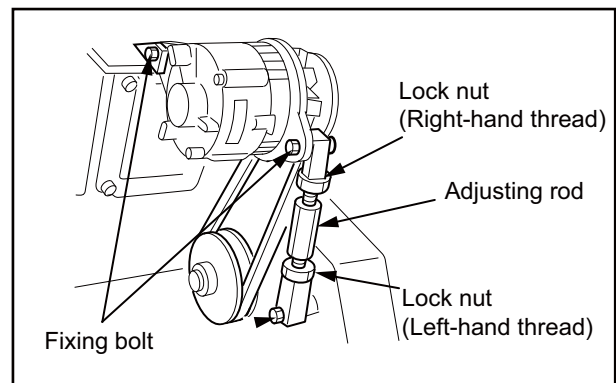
Belt Tension (Alternator Side) - Adjust
